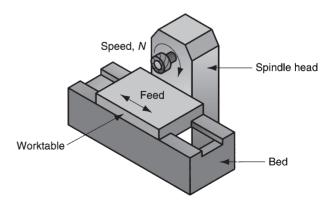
Simplex bedtype milling machine horizontal spindle.
